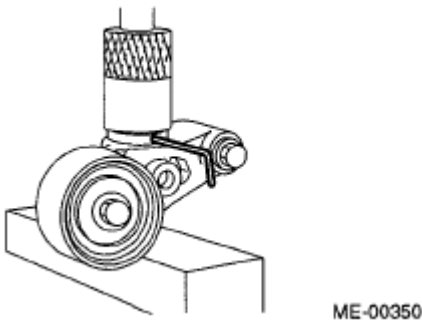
Locating Automatic Belt Tension Adjuster Assembly Bolt
